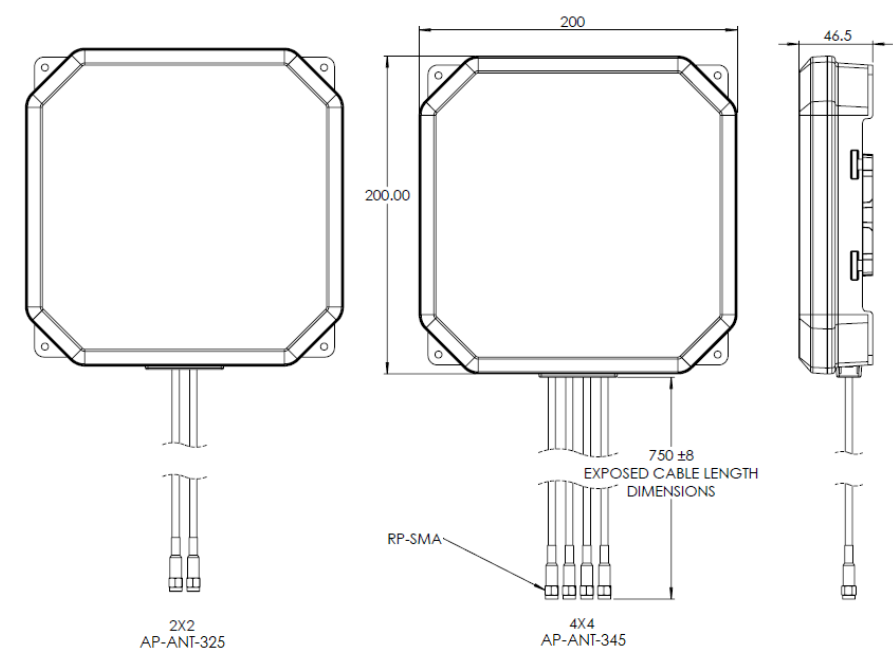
Mechanical drawing showing dimensions of front and side view of AP-ANT-325 and AP-ANT-345
